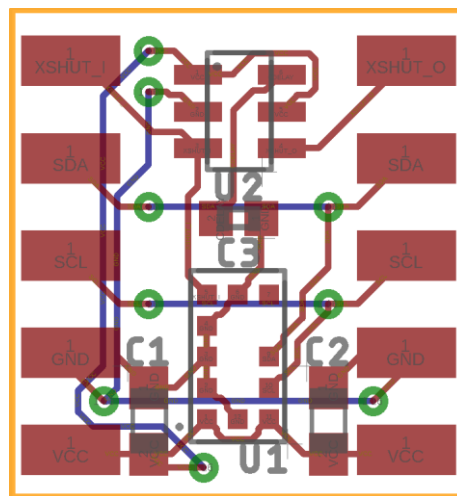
VL53L0X INTERFACE PCB LAYOUT
